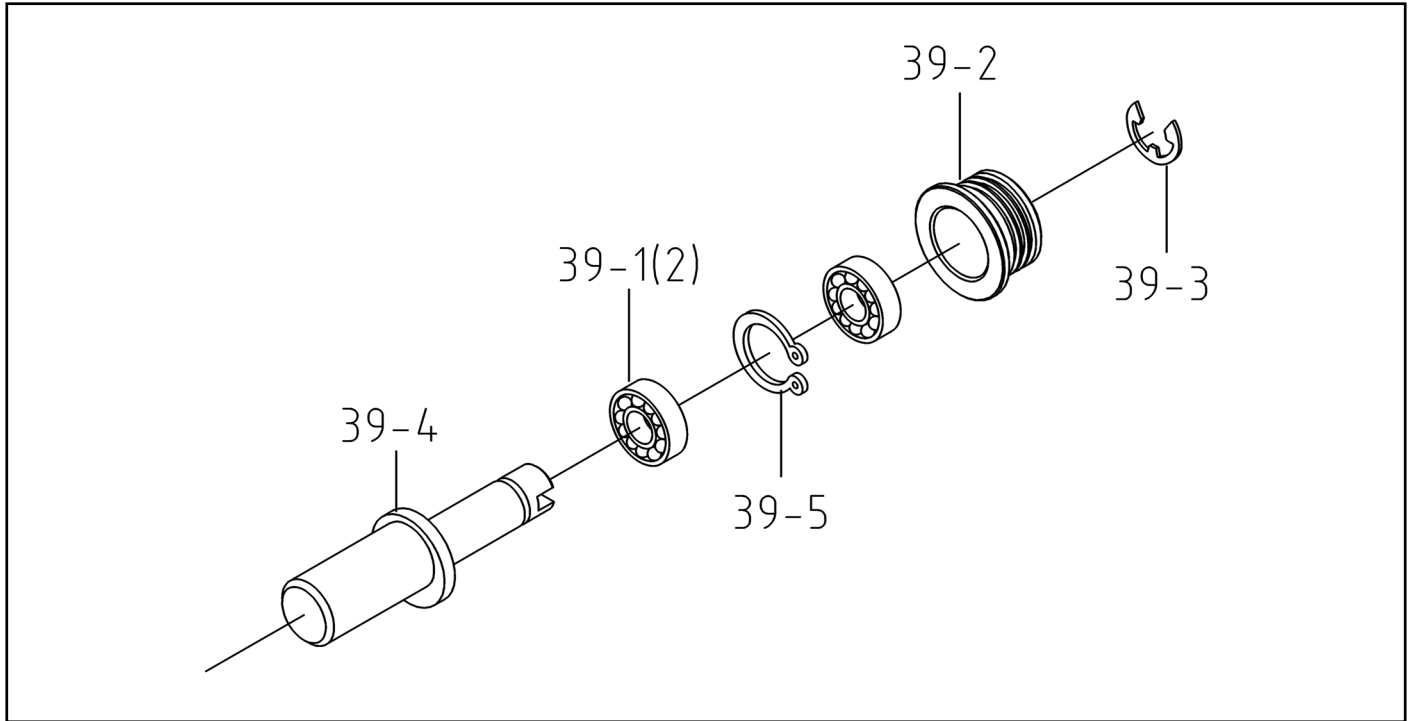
Exploded View of the VSF-14 Bearing Shaft Assembly
